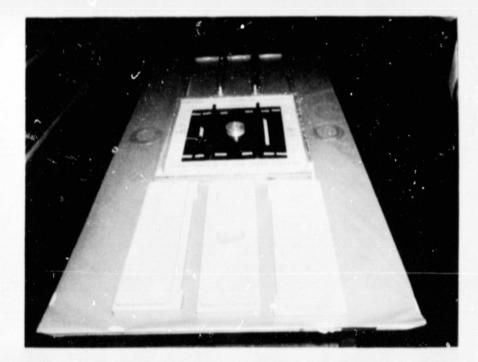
Tool Used to Mold Shear Test Panels (Test Item 21)
